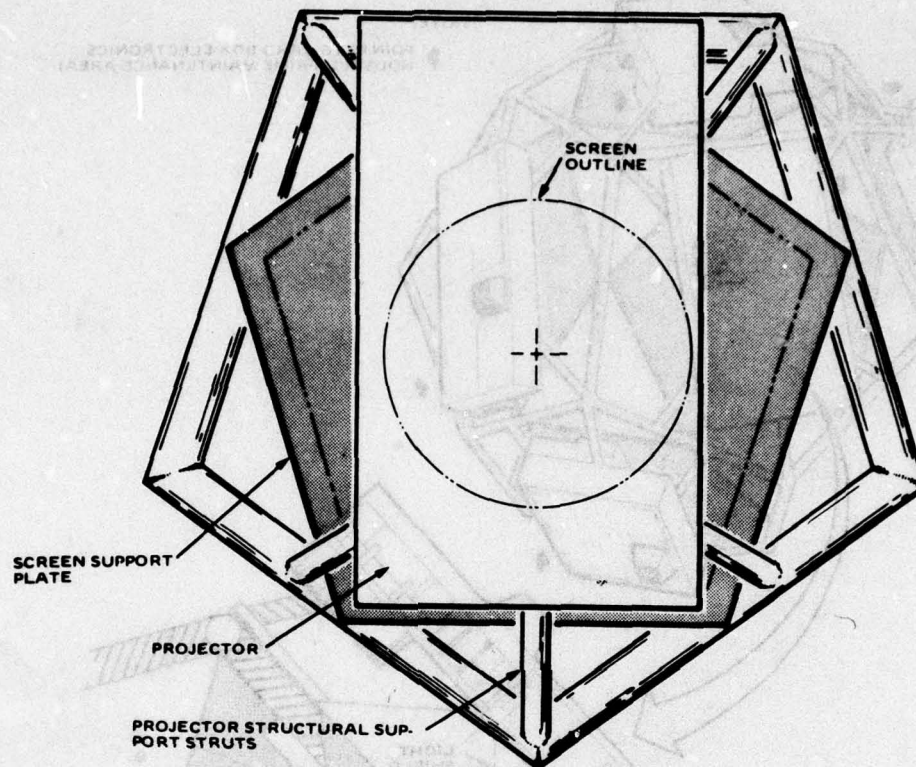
Rear View of Projector Mounted in Place. View shows screen support structure and projector mounting arrangement.
